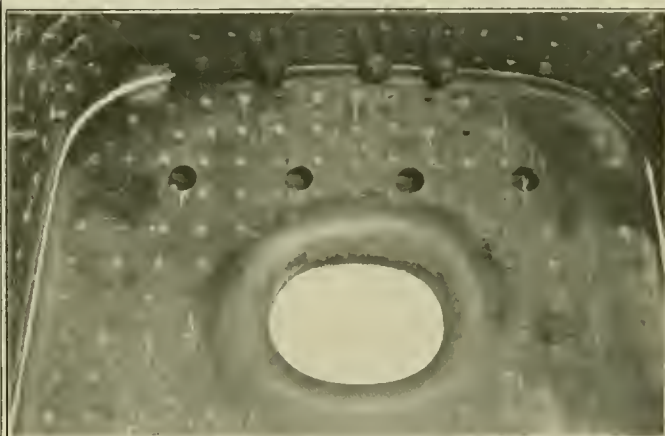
Door Sheet of New Firebox Partially Welded In
